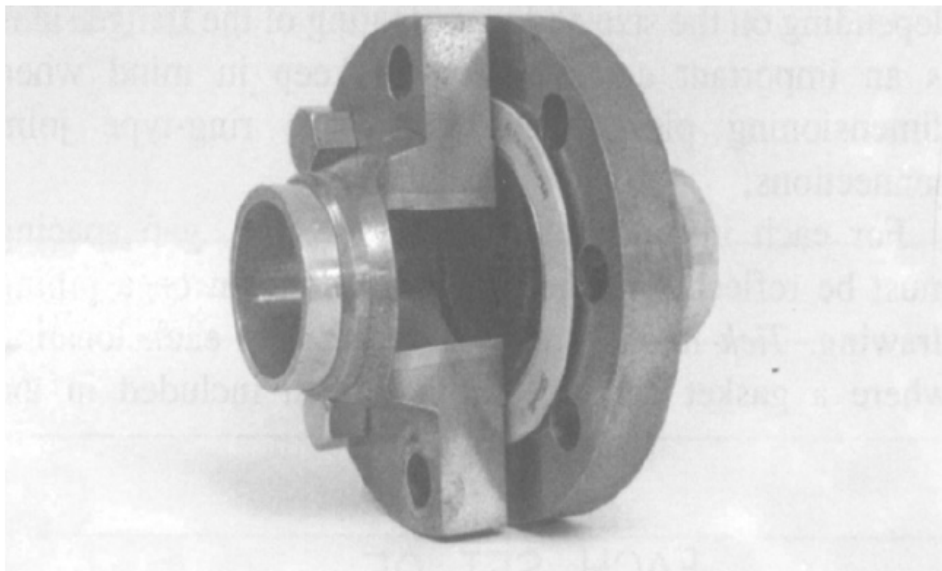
Flat ring gasket and flange. *Courtesy of Flexitallic, Inc.
